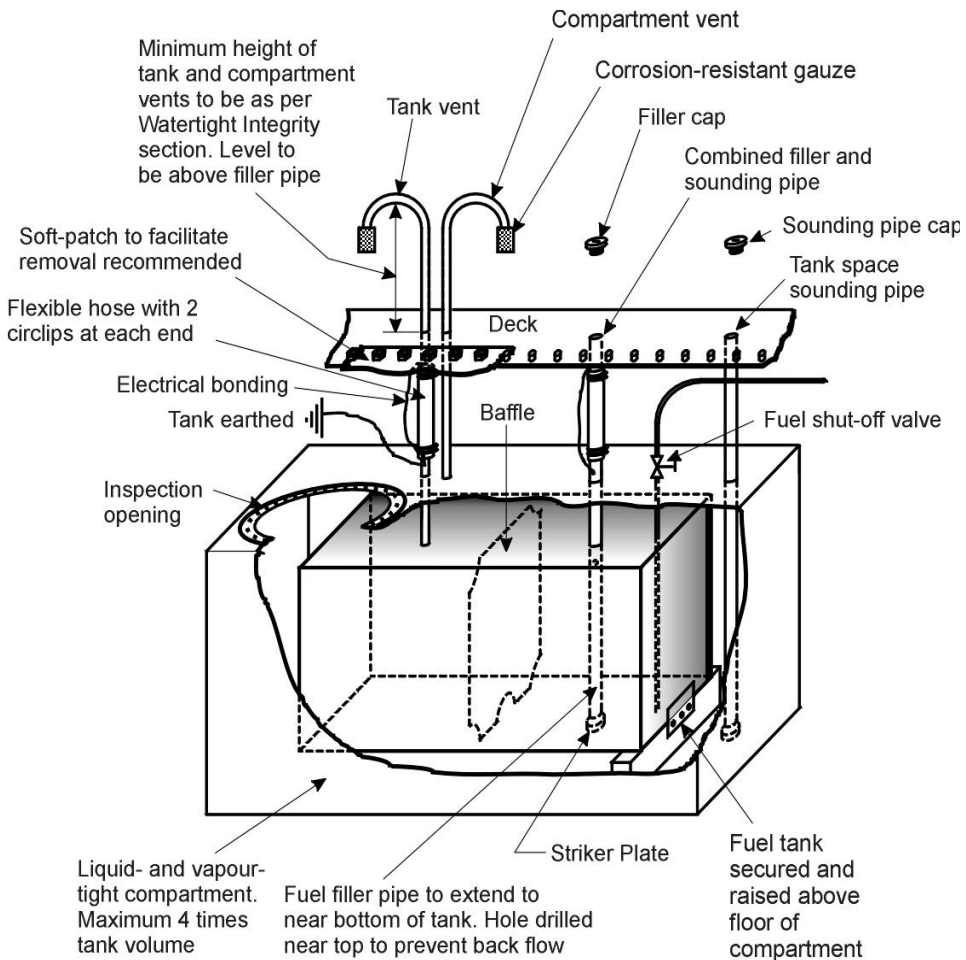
Alternative example of an under-floor fuel tank installation for fuel less than 60°C flashpoint.
